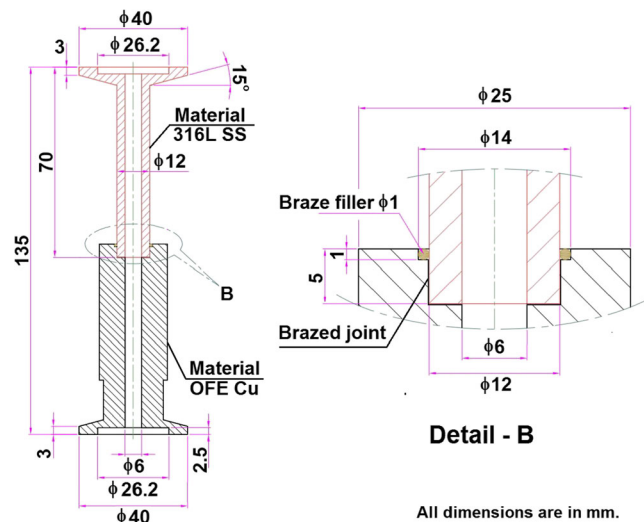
Dimensional details of OFE Cu-316L stainless steel (tube-tube) pre-braze assembly for fabrication of specimen with capillary joint
